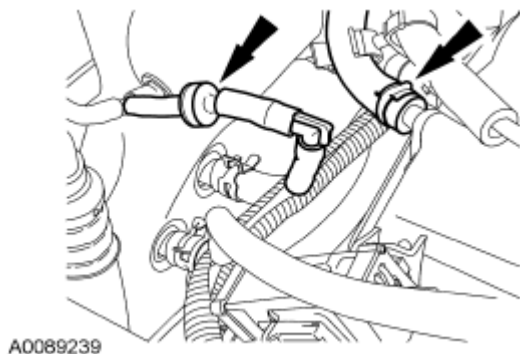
Locating Brake Booster Vacuum Tube & Vacuum Reservoir Tube
